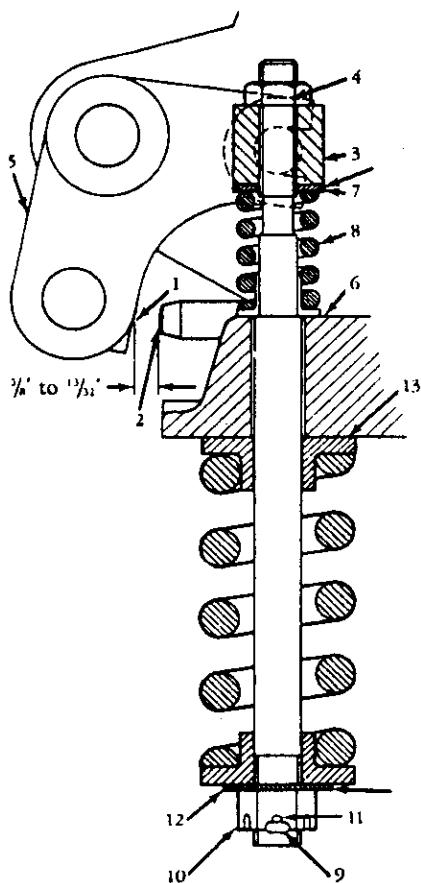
After assembly, draft control spring and spindle must be adjusted as shown.
